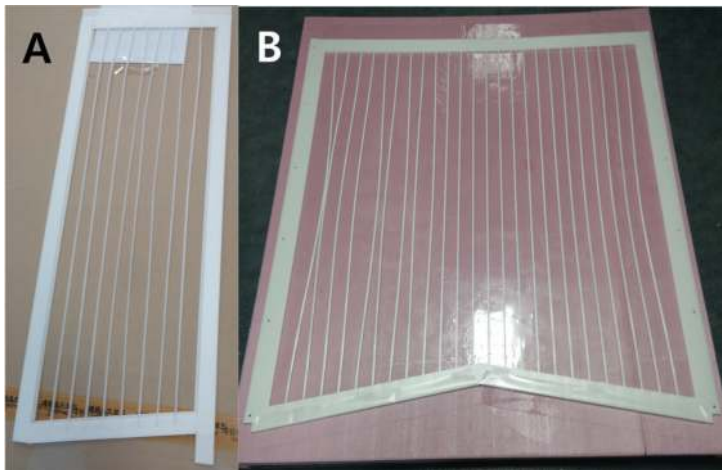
Hand carved and assembled spacer layer (A) and die pressed spacer layer (B).
